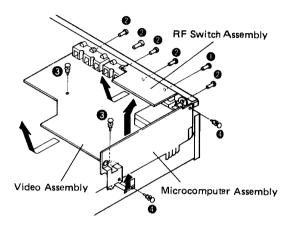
How to demount the Video Assembly, RF switch Assembly and the Microcomputer Assembly
